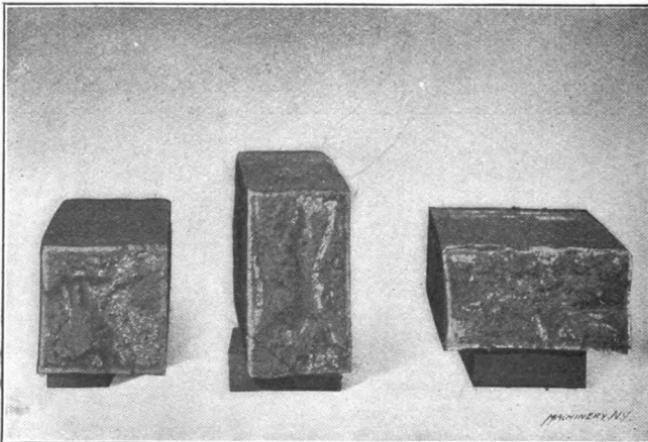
End View of the Test Pieces showing Depth of Hardened Portion and Character of Fracture
